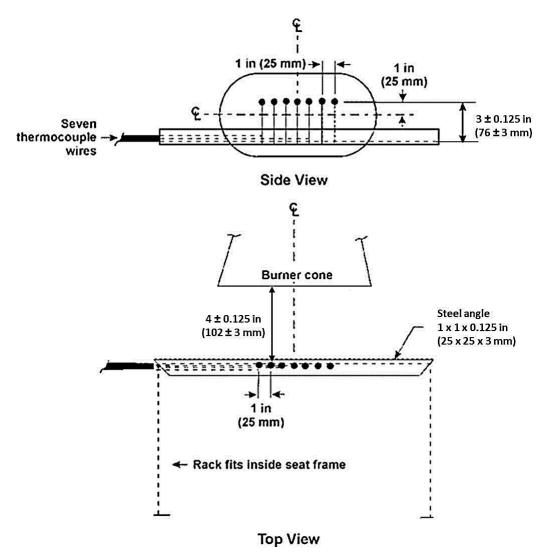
Top and Side Views of Thermocouple Rack Bracket
